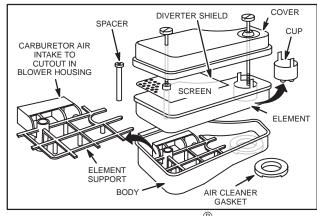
DUCTED OIL-FOAM[®] AIR CLEANER, VERTICAL CRANKSHAFT
